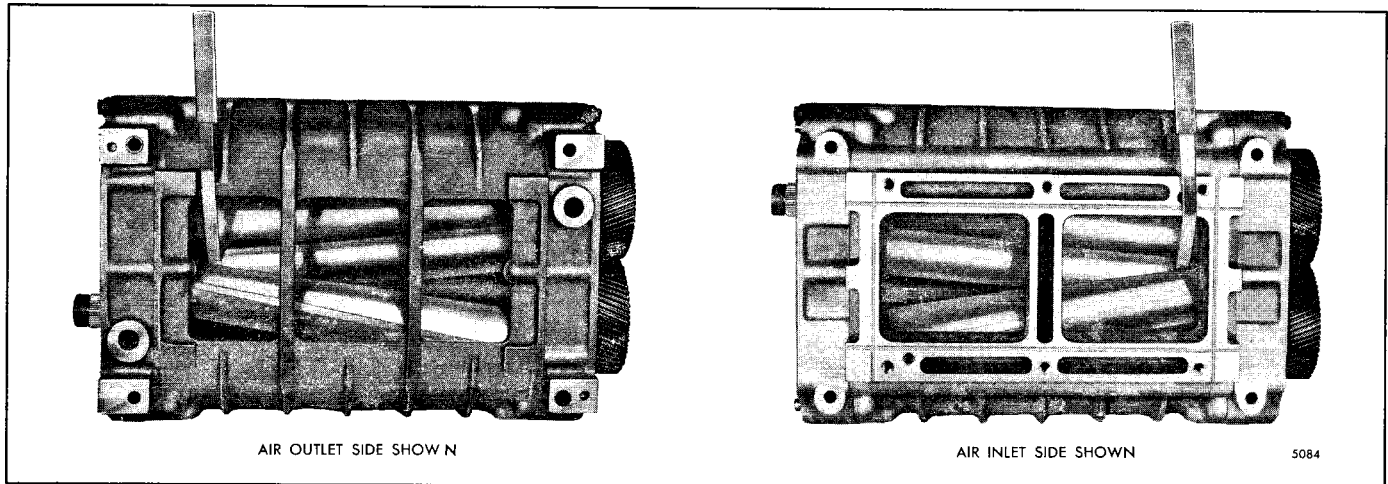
Measuring "CC" and "C" Clearance Between Blower Rotor Lobes
